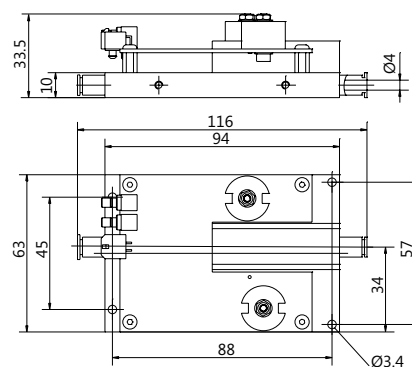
Outline drawing of PCD-UHRS series driver with general purpose pad
